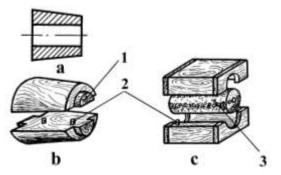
Casting (a), pattern (b) and core box (c): 1-core print; 2-slotted key; 3-core
